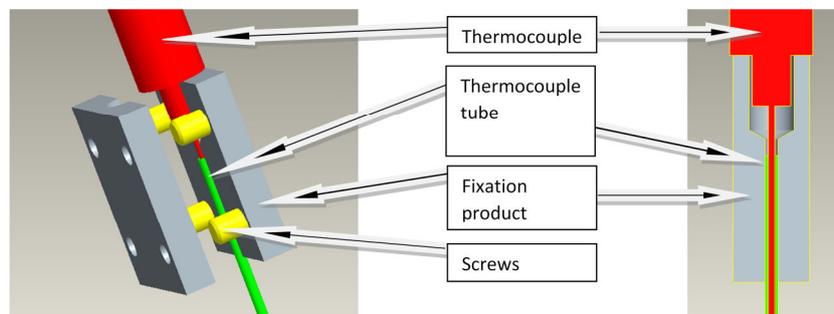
Views of fixation and ensuring positive contact thermocouple on the valve seat. On the left is a layout view 3D model, cut right across the assembly.
